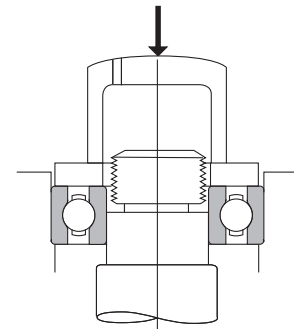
Simultaneous Press Mounting of Inner & Outer Ring
